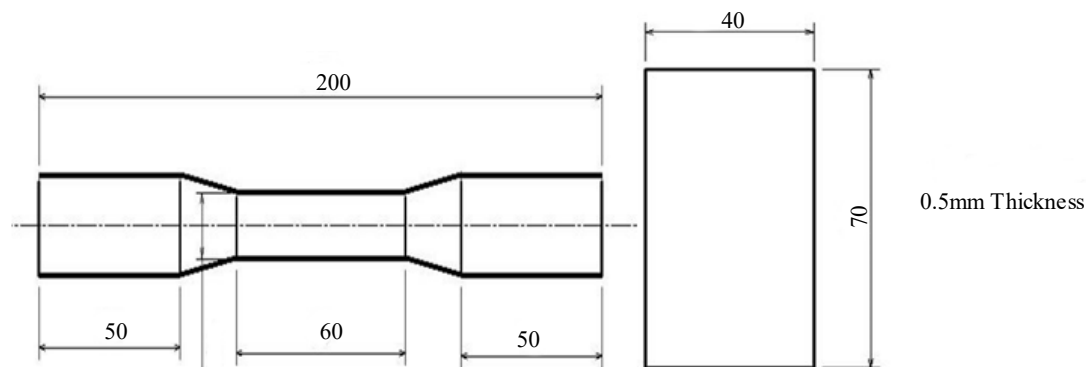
Mild steel Plate Test specimen and fatigue test rod specimen of 20 mm diameter.
